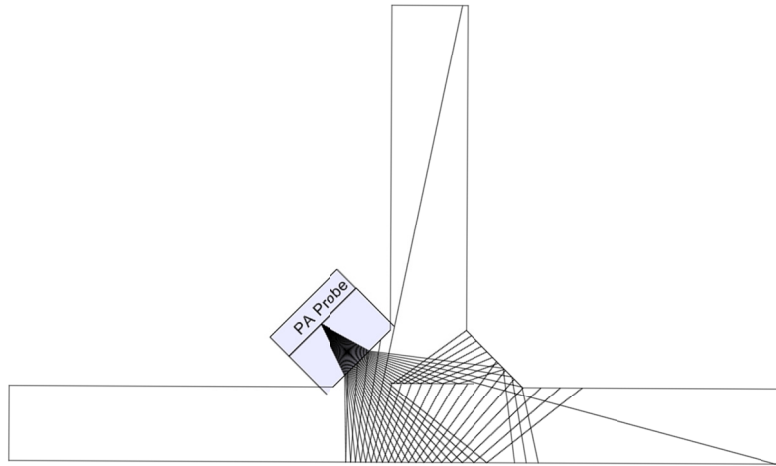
The electronic scan configuration for the T-joint fillet welds.
